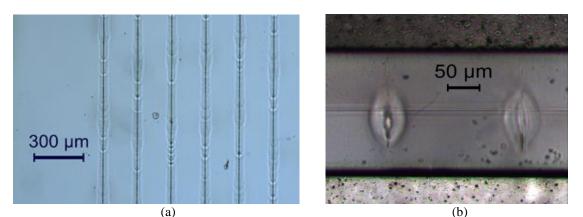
Optical microscope images of the weld features in two 100 µm thick flexible glass components obtained by ultrafast laser microwelding (a) Top view of a series of welds; (b) cross section of the weld seam
